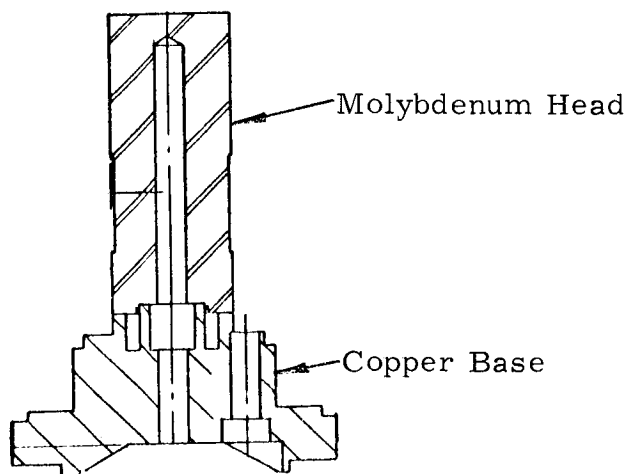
COLLECTOR SUB-ASSEMBLY
